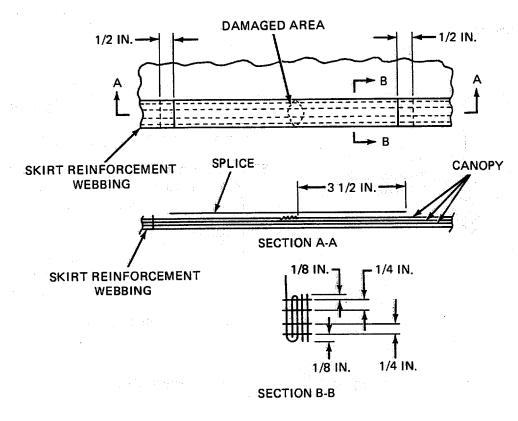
Skirt Reinforcement Webbing Splice Details.
